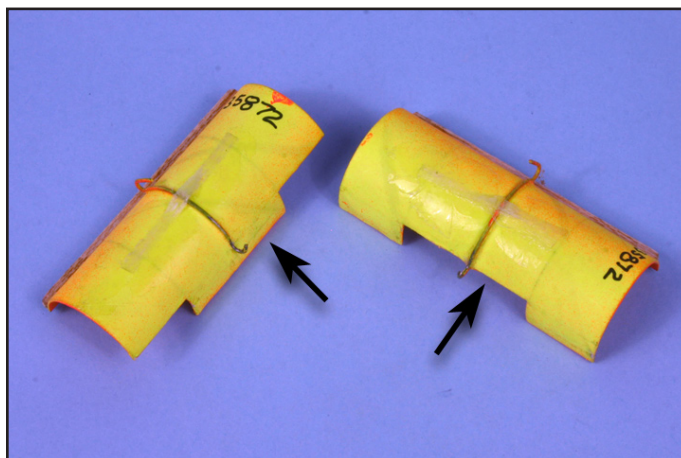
The first interlocking indexing tab was cut into the cradle on the runner side of the tube. This worked fine when I was using music wire for the rail runners.
